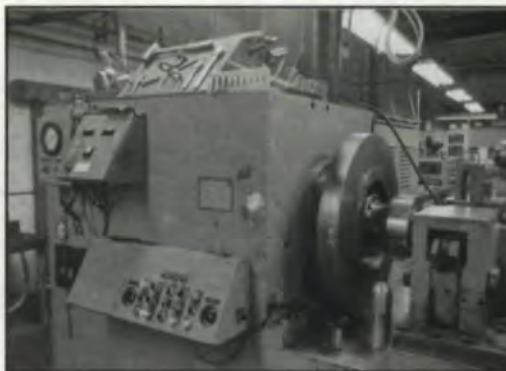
Inertia welding machine used in majority of welding trials.
